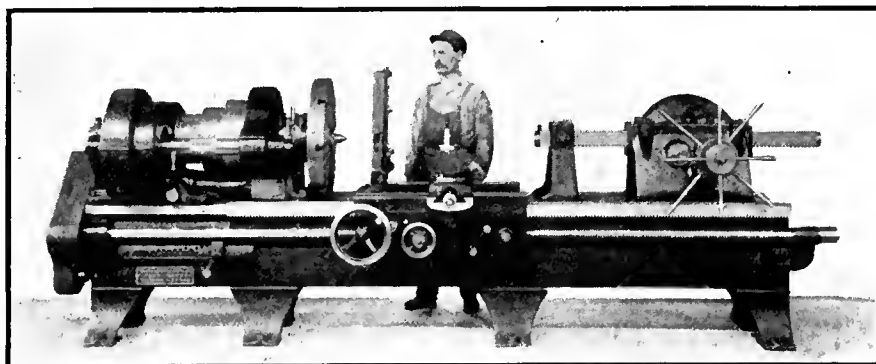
FRONT VIEW OF 26-IN. DOUBLE BACK-GEARED ENGINE LATHE EQUIPPED FOR BORING HIGH EXPLOSIVE SHELLS.
